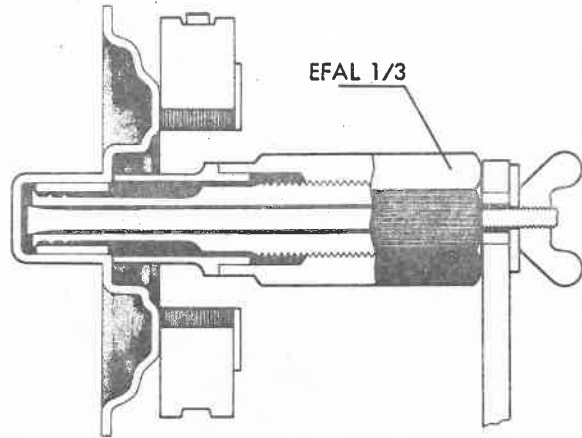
Bushing extractor, make Bosch, mounted on bearing shield
